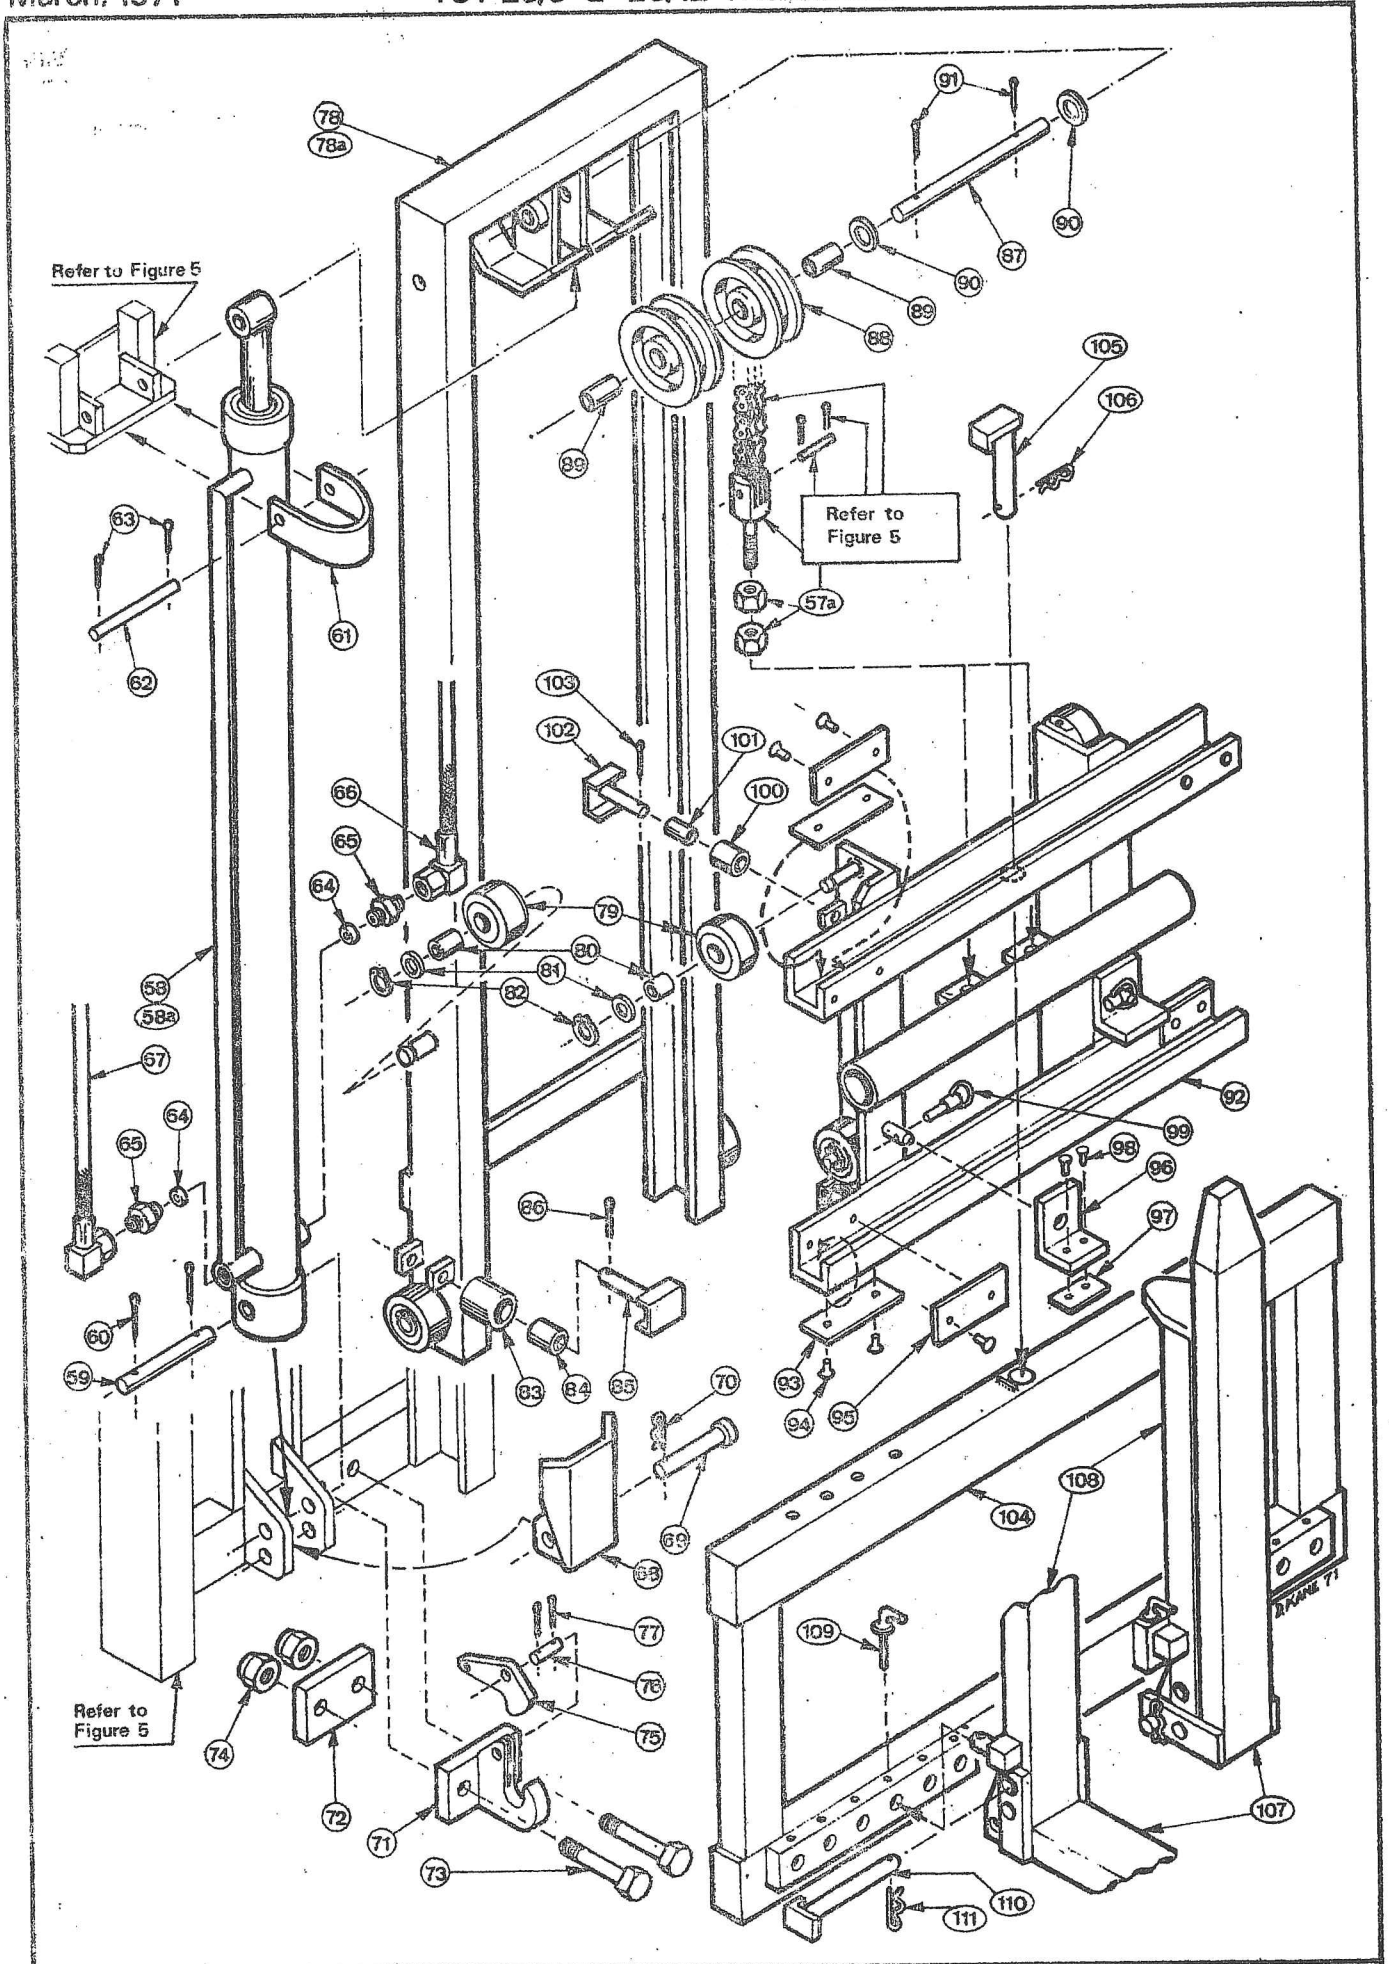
PARTS BREAKDOWN, INNER MAST ASSEMBLY
